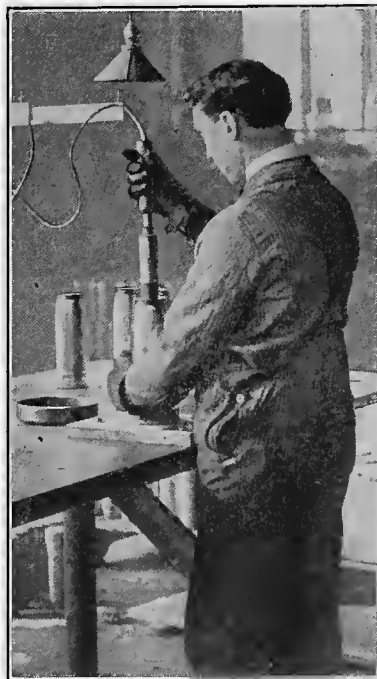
SOLDERING THE POWDER TUBE TO THE FUSE SOCKET
